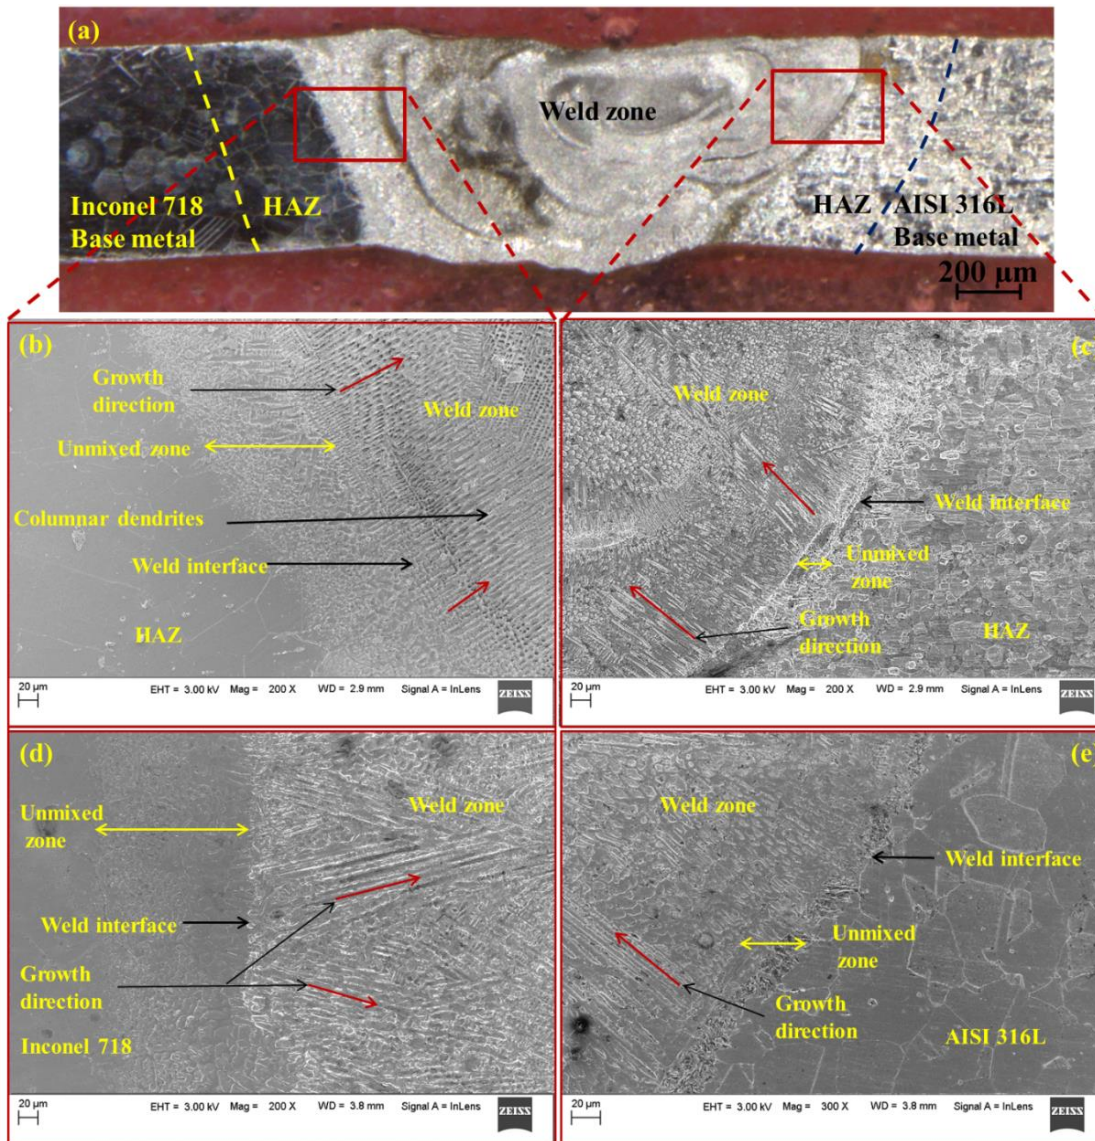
Weld interface and weld zone of (a, b, c) PD1 and (d, e) PD5 weld
